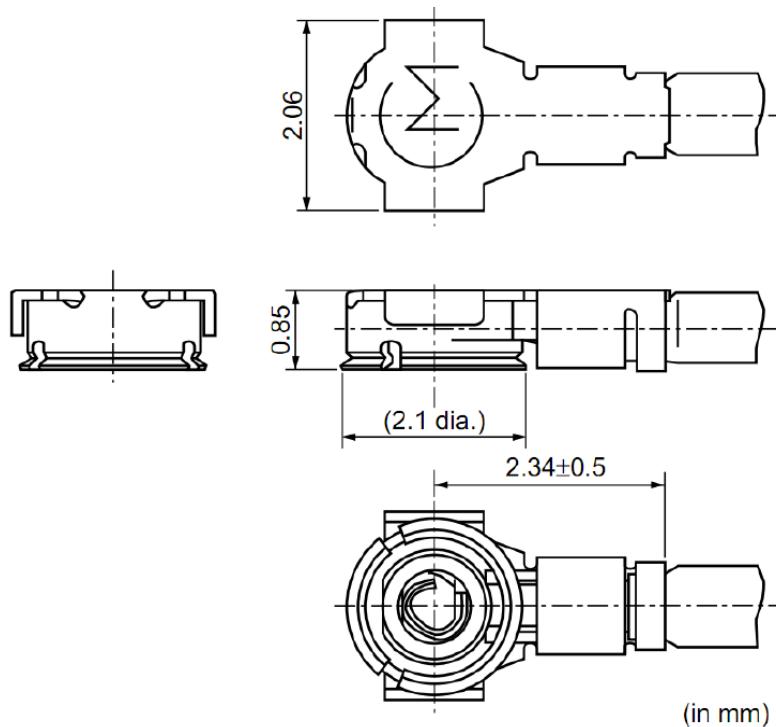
Dimensions of Mated Plugs (Ø0.81/Ø1.13 mm Coaxial Cables) (Unit: mm)
